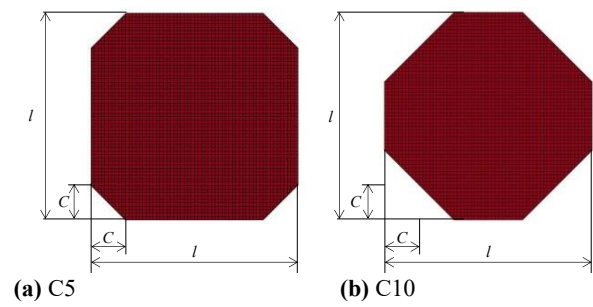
Schematic of workpiece for square cup drawing and ironing process
